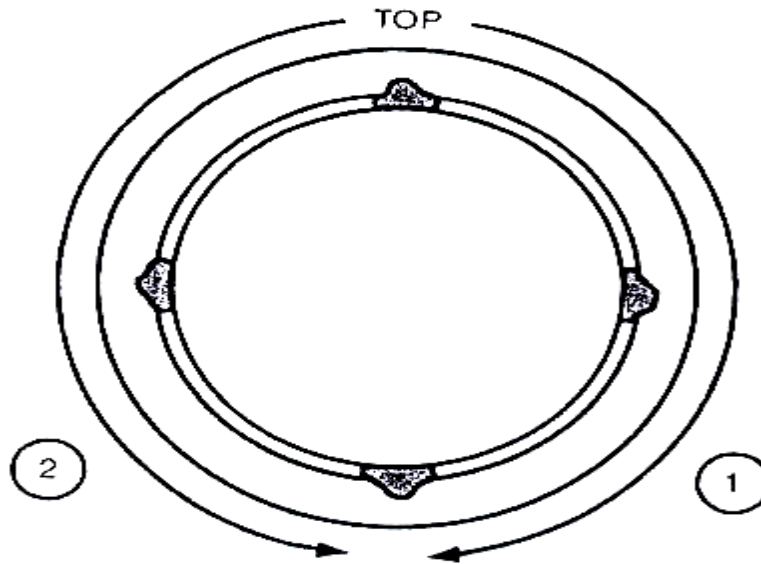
Torch and rod manipulation for second pass in large-groove pipe joint.
